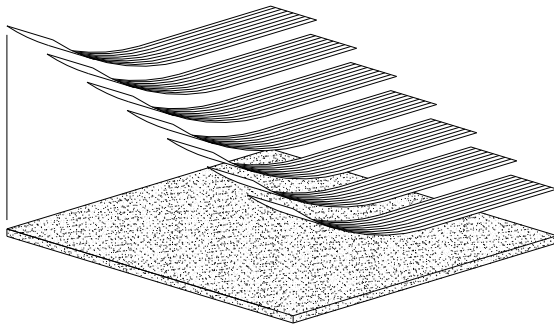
The first step in hand-lamination of HPPC sheets, spot welding of 90° continuous fibre reinforced tapes onto SuperLite® core to form the first skin ply.
